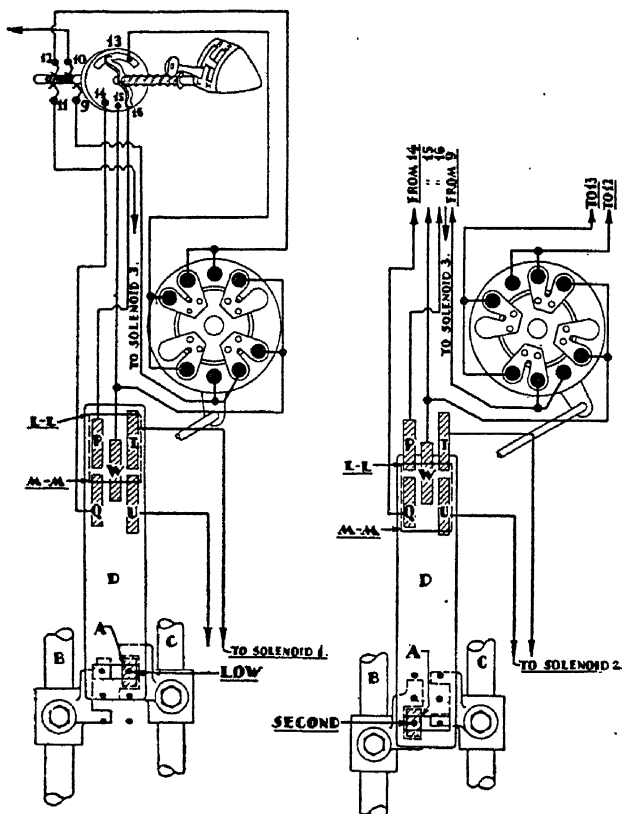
Showing Interlock Switch and Electrical Connections. (Left) Low Gear. (Right) Second Gear.
